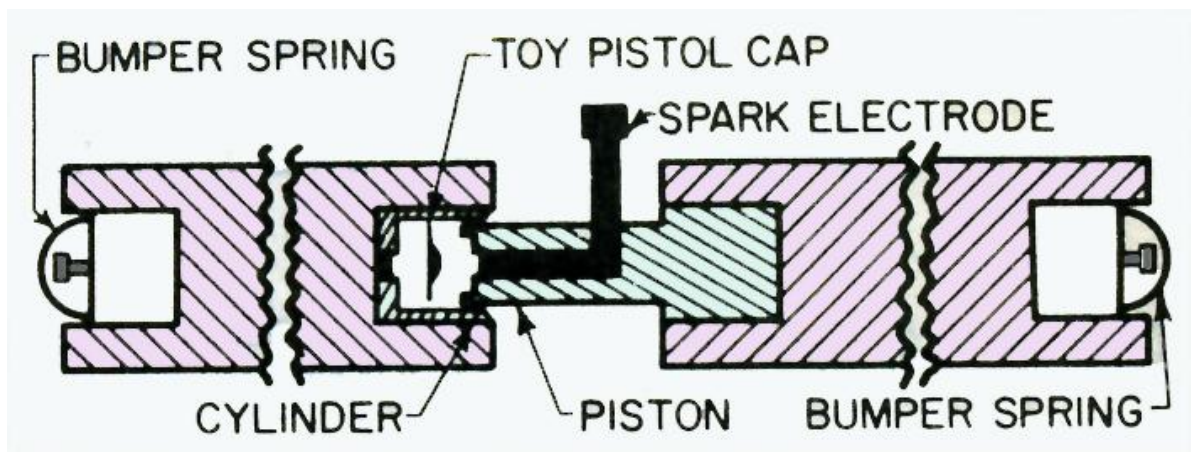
Sectional view of gliders with explosive interaction cylinder attachment.
